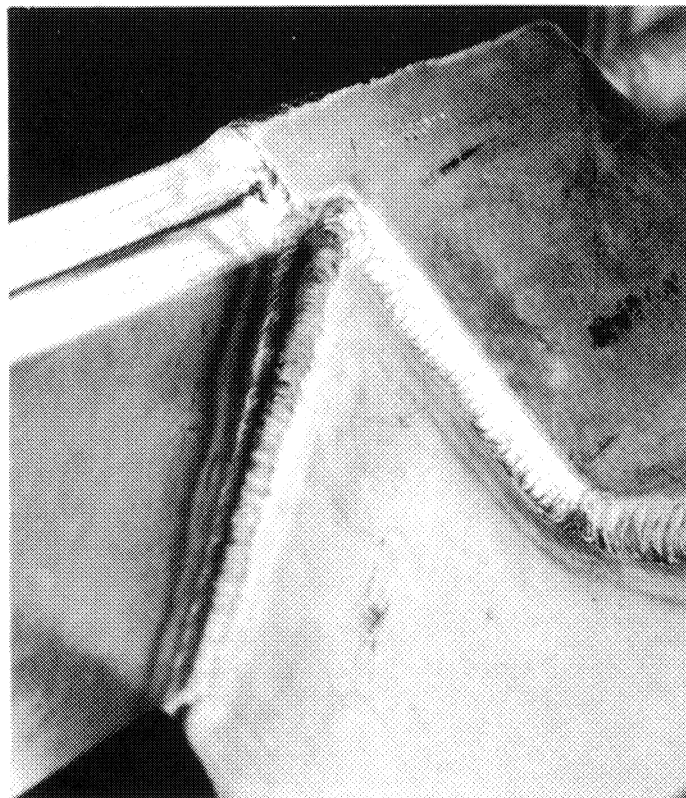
Welded casing showing transition from 1.0 mm sheeting to 5.0 mm plate, as seen from the inside of the coil
